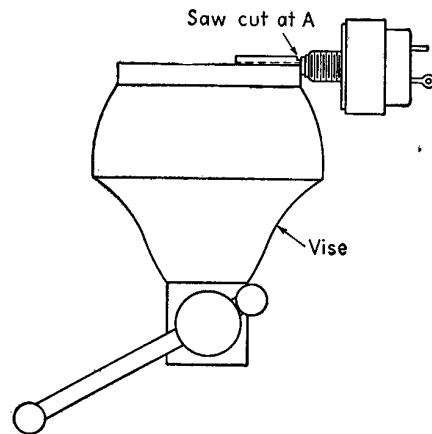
Cutting the volume-control shaft for a push-on knob.
